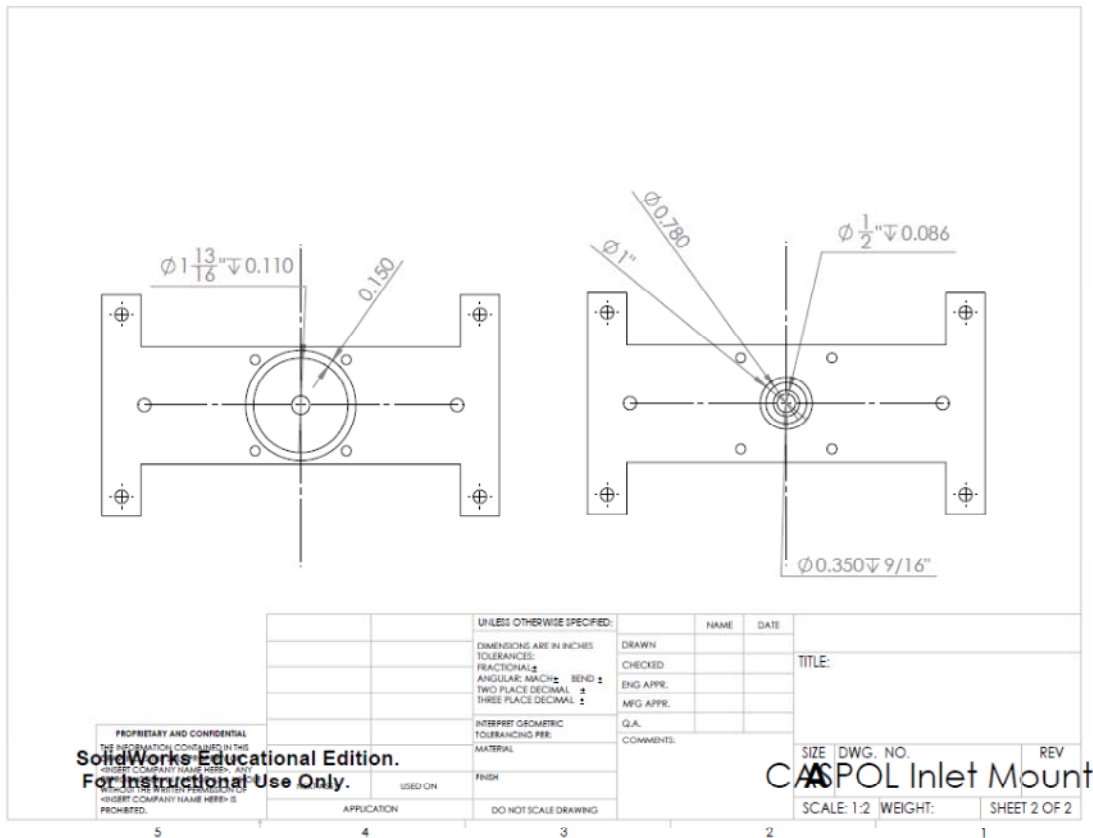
Machining diagram for the construction of a new CFDC sliding plate which is mountable to the CASPOL.
